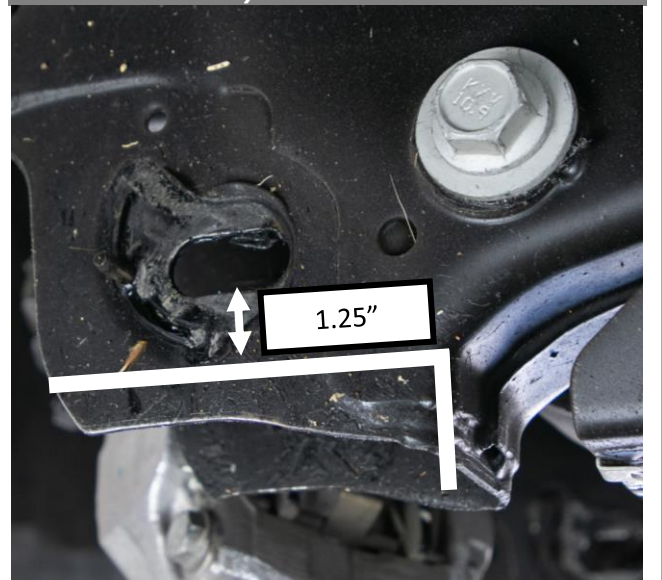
Driver's Side Rear Crossmember, After Trimming
